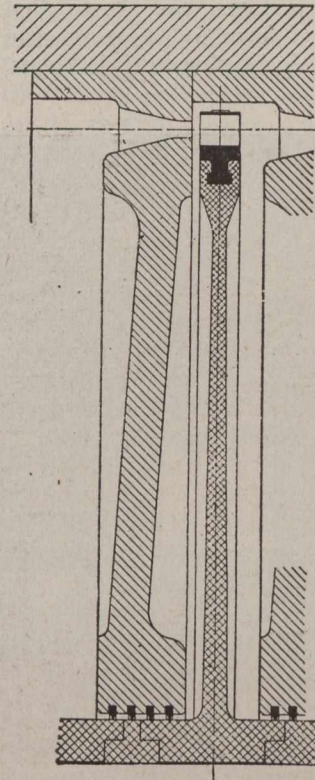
Runner and Guide Wheel of Zoelly Turbine.
